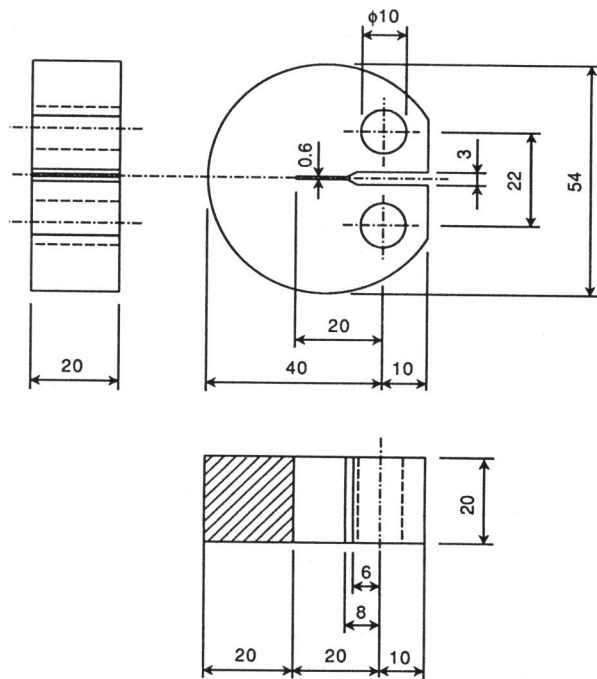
Typical geometry and dimensions of disk-shaped compact tension specimen.
